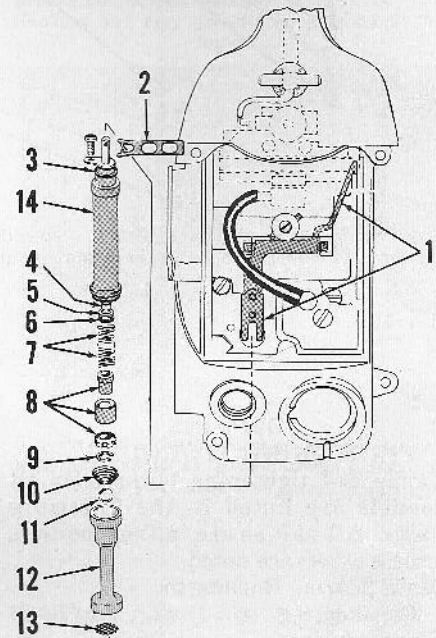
Exploded view of the manual chain oiler pump. Early models use spring (10) and later models have special webbing in the housing to center check ball (11).
